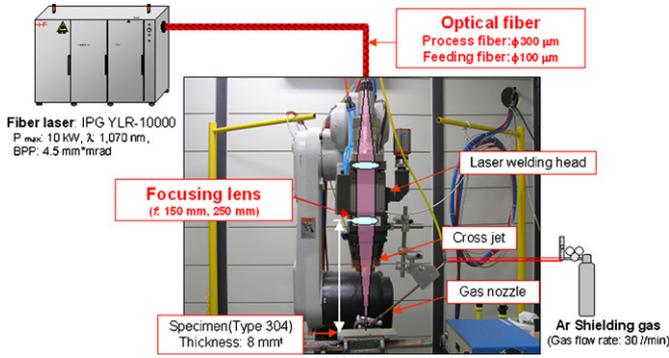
Schematic experimental set-up in high-power fiber laser welding.
